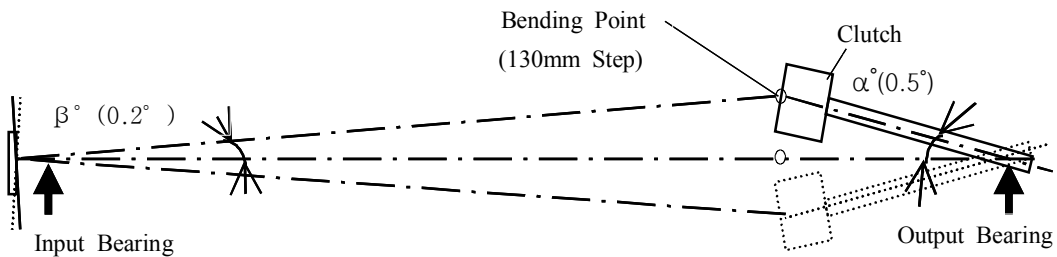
clutch shaft bending and whirling by crack¹⁾
